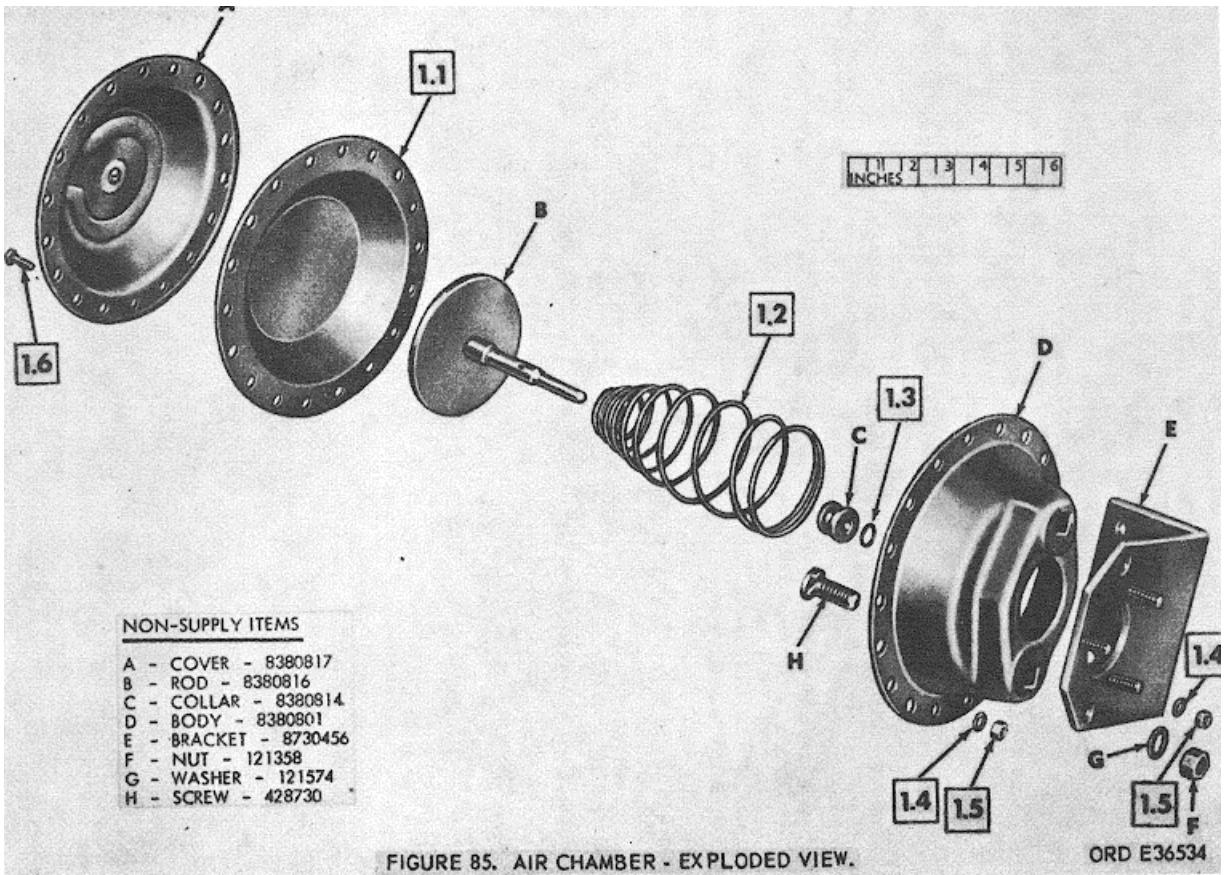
AIR CHAMBER - EXPLODED VIEW.
